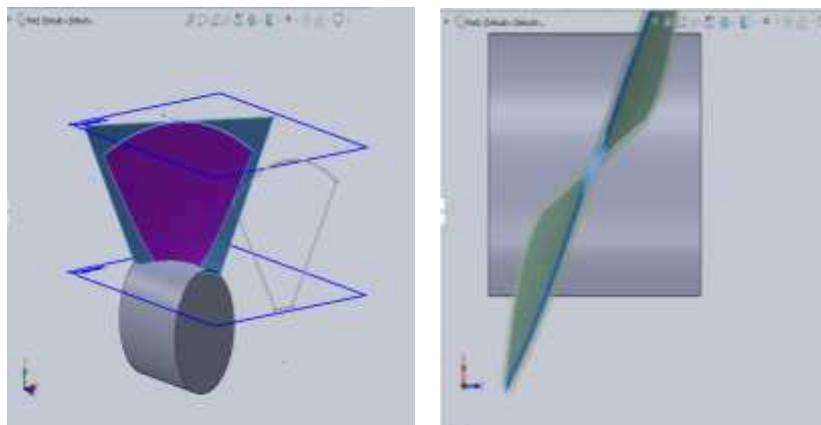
Surface trim is used to trim the unwanted portion of the blade
